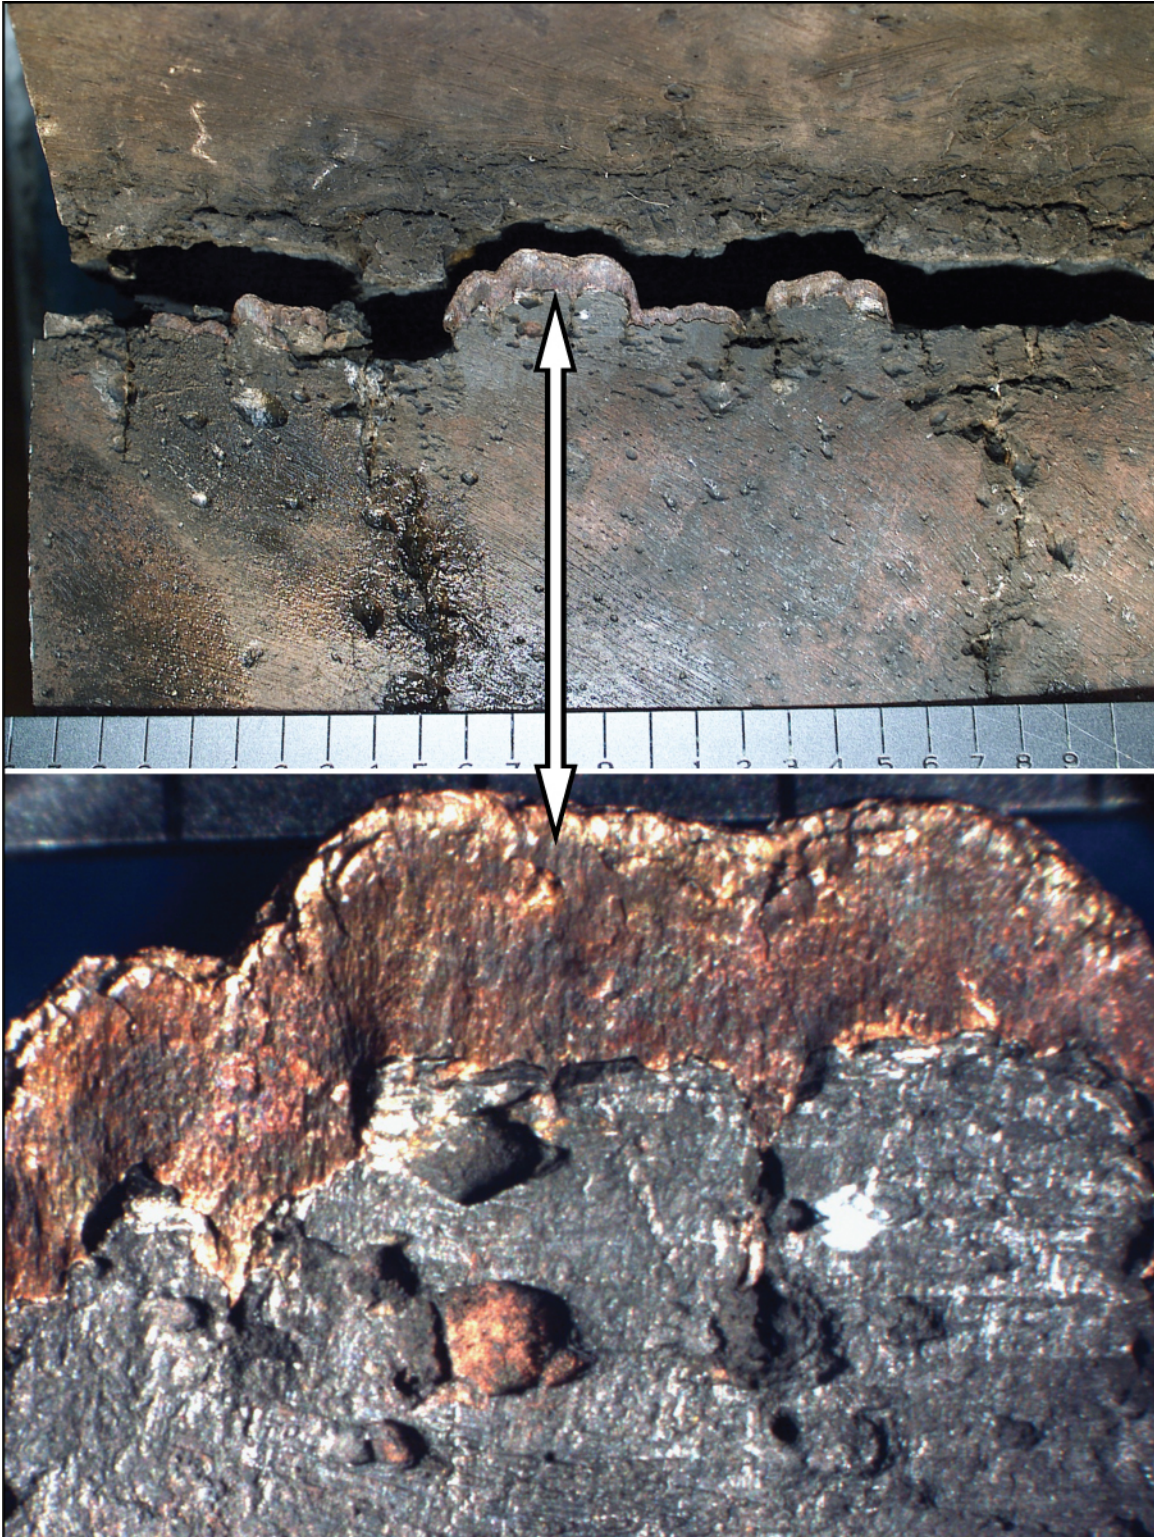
View of matching fracture halves (above) and enlarged image of copper nuggets (below) at the edge of the fracture. Arrow points to area of enlarged image.
